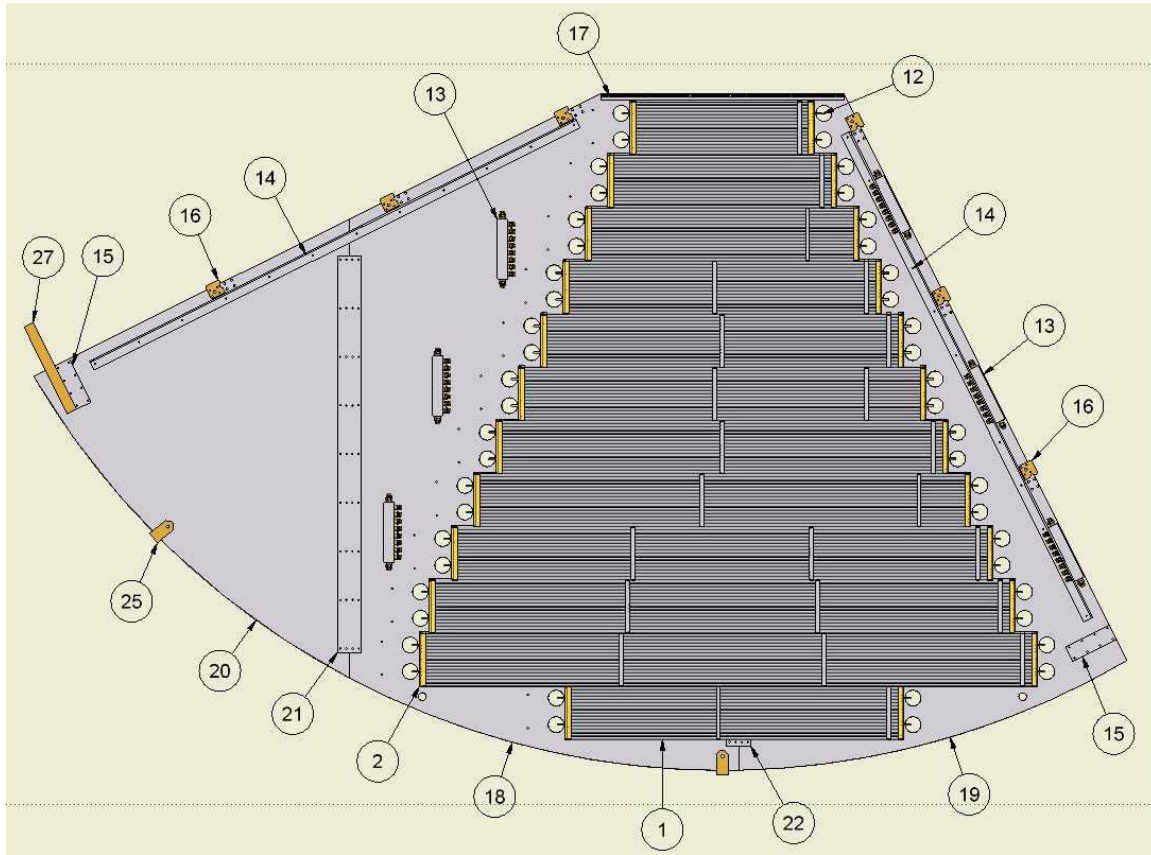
Assembly details of a radial octant plate. Each 1/4" thick radial plate is constructed out of three sections that are joined together using joint-bars (part 21 and 22). The blank area to the left of the tubes will be used for gas and electronics access. Gas will be distributed from three manifold assemblies (part 13). Stiffening-angles (part 14) are included to inhibit the bending of the octant plate during installation. The radial edges of this plate and adjacent plate are connected by knitting-brackets (part 15) and tie-bars (part 27).
